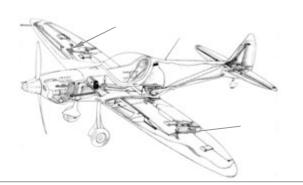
Inserting the aileron bellcrank into the bearings by sliding and tilting
